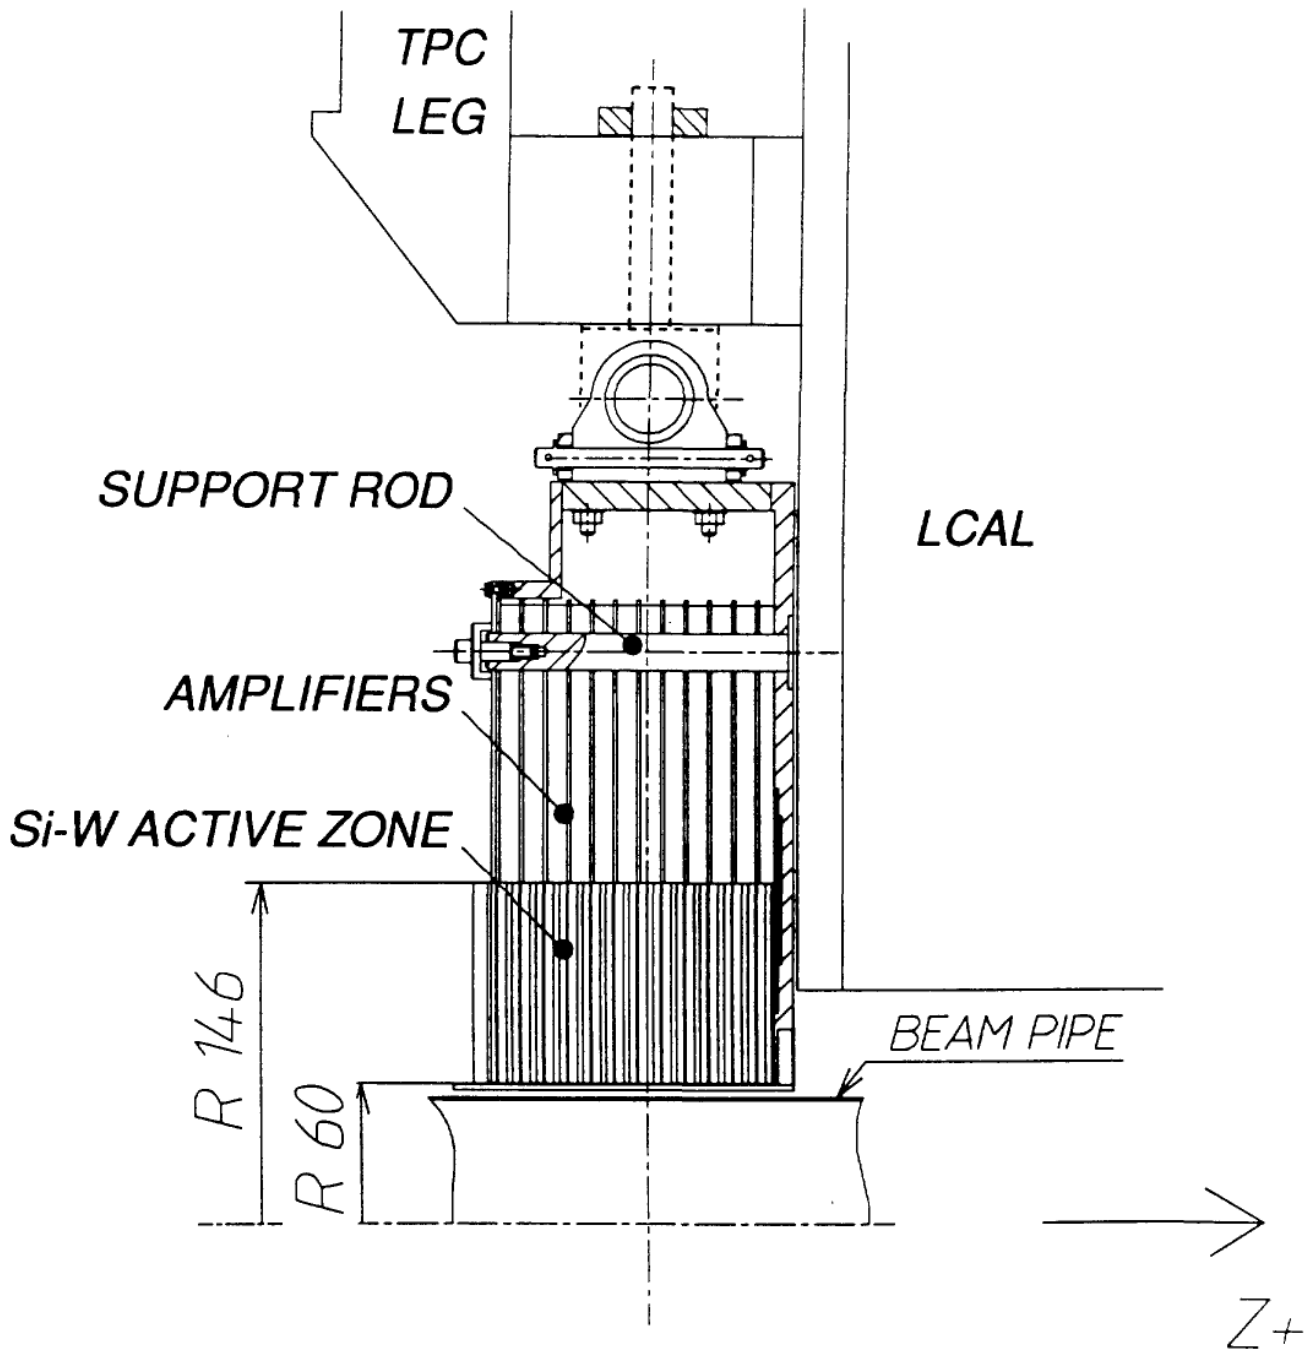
Section view of one SICAL calorimeter. The twelve sampling layers are formed from W-Si-W minimodules which are supported internally on rods passing through G-10 and aluminium support plates.
